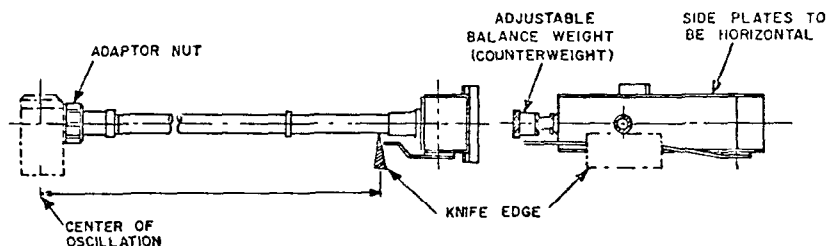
Pendulum Assembly Showing Location of the Point of Balance.
